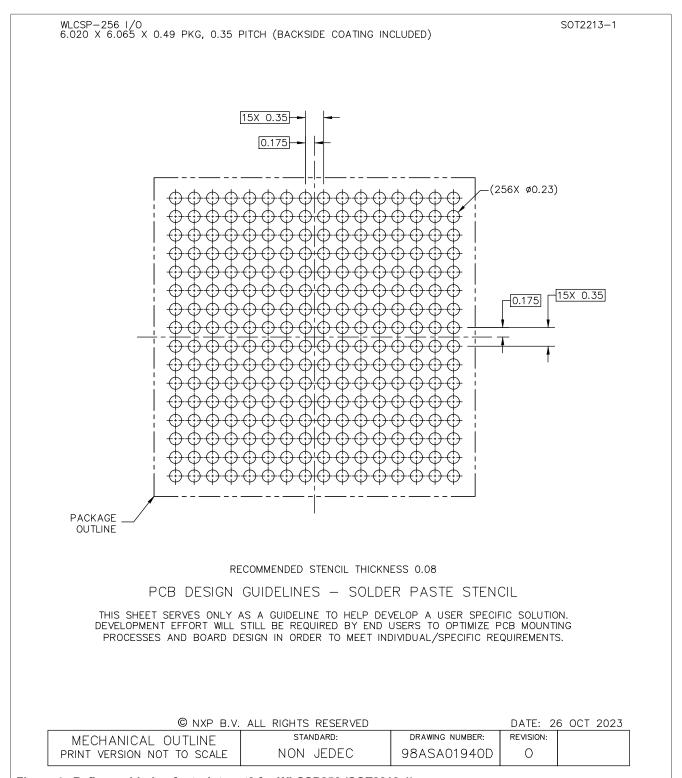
Reflow soldering footprint part3 for WLCSP256 (SOT2213-1)
